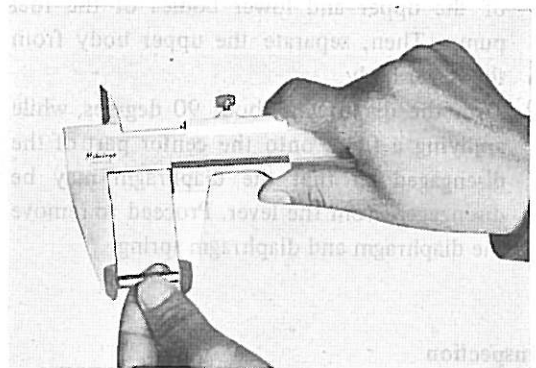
Checking Fuel Pump Push Rod for Wear
